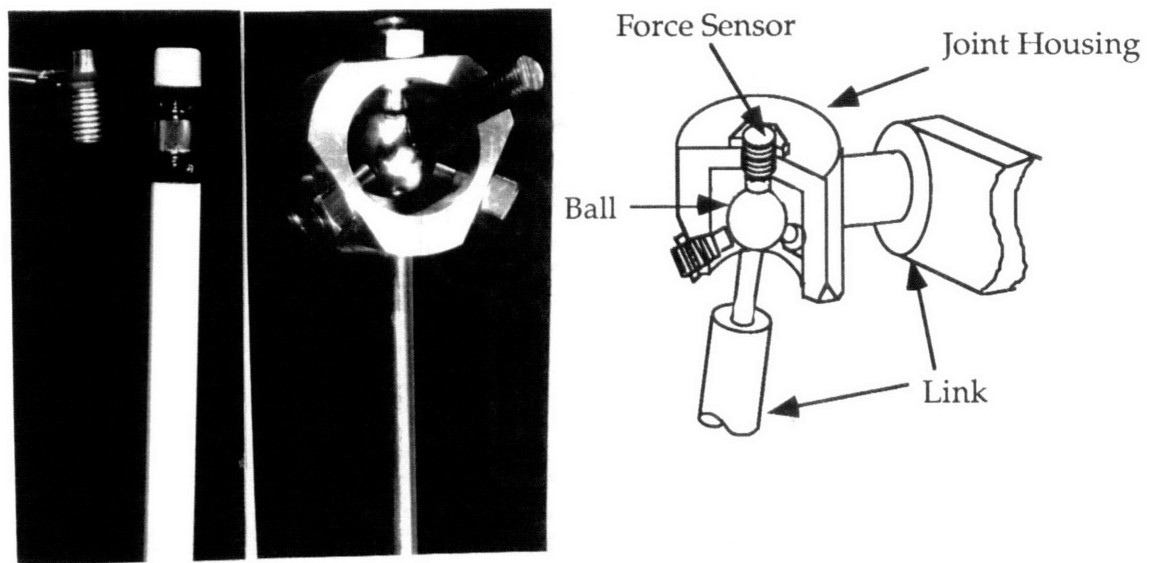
(a) Instrumented, adjustable clearance ball joint.
